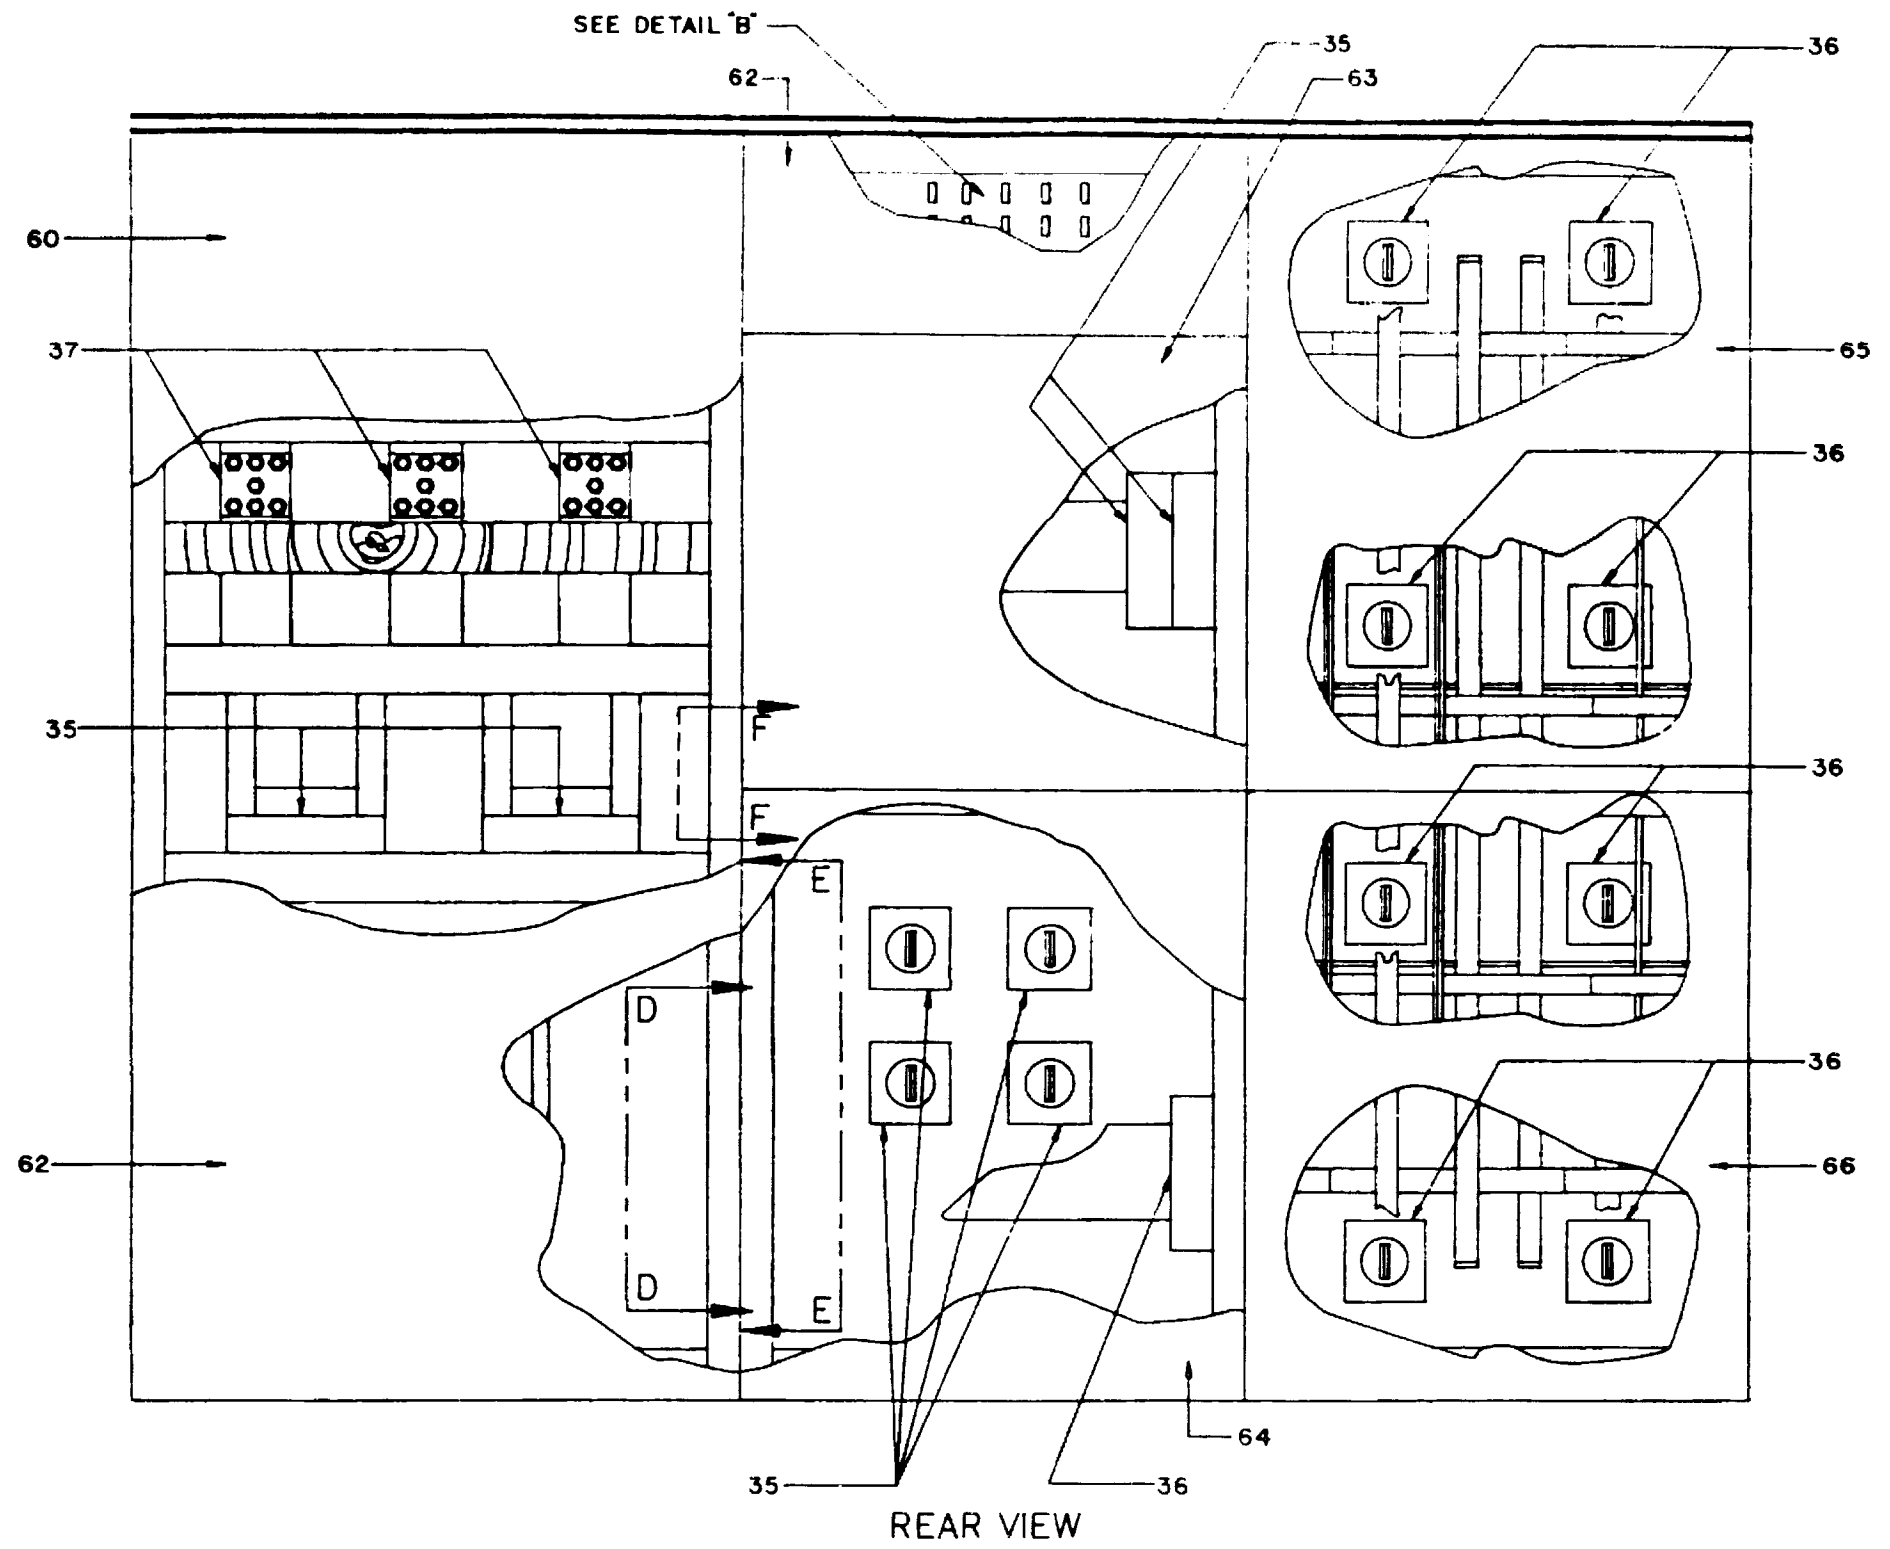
2SA Switchboard Assembly (Sheet 3 of 4)
